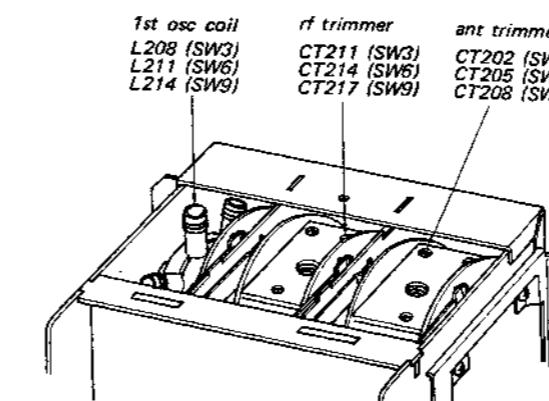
Adjusting parts for SW3, SW6, SW9
